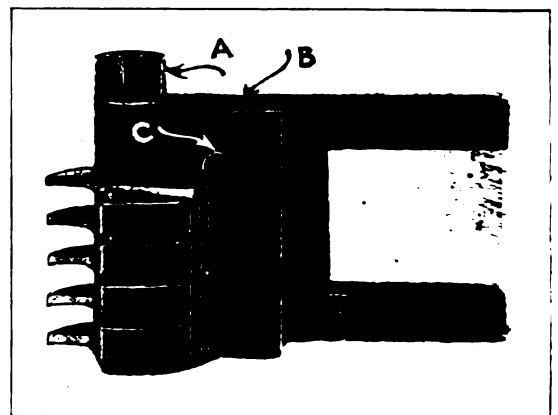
MULTIPLE TOOL FOR CUTTING OFF PISTON RINGS
